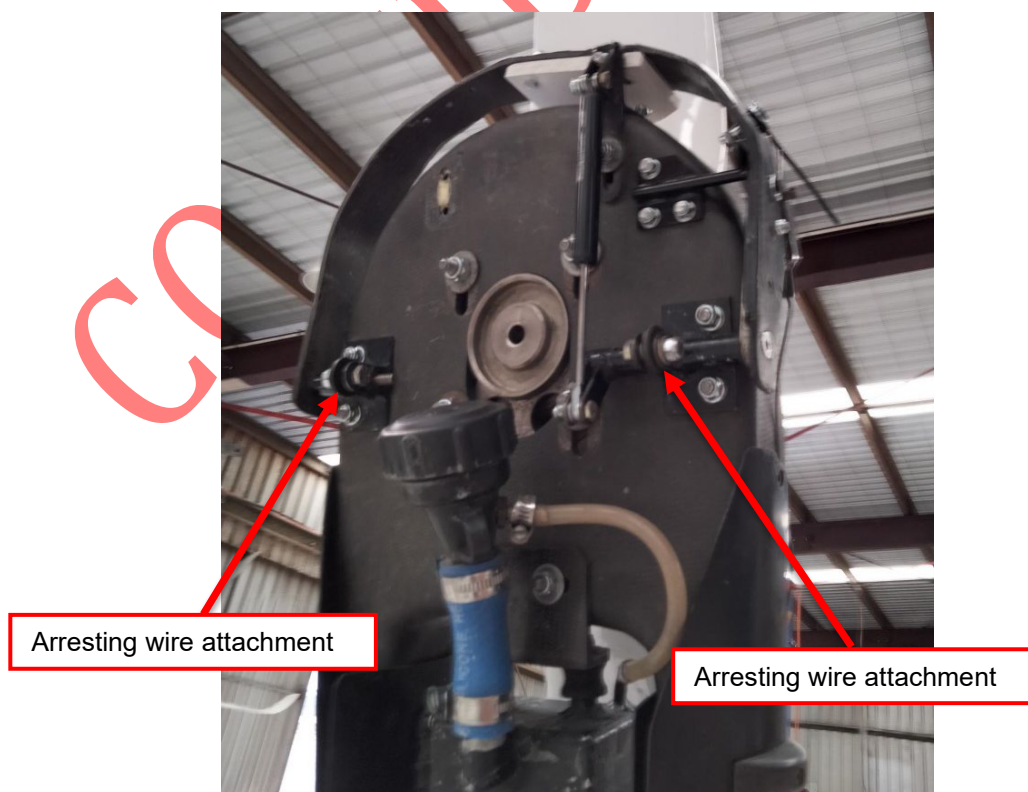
Rear of [REDACTED] Pylon Prior to Engine Run Showing Open Centre Bolt Hole with M10 Bolt Missing. The Position of the Two Arresting Wires are Indicated.
